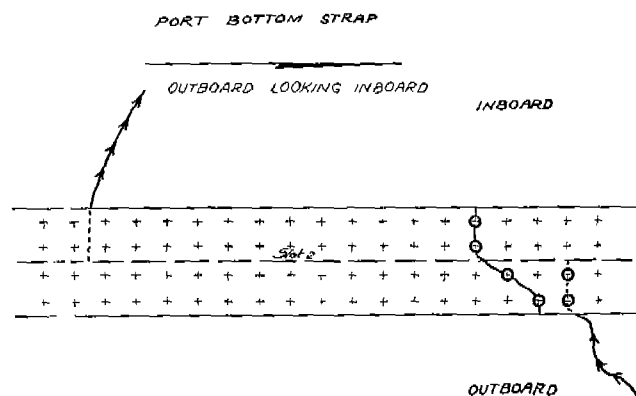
Diagram of deck crack that crossed ship crack arrester. Entering and outgoing cracks were separated by 15 rivet holes. The arrester strap failed in shear in between
